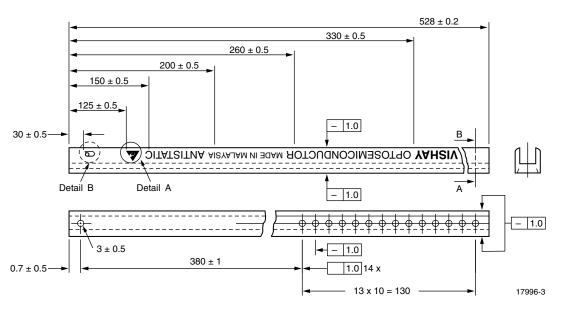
Shipping Tube Specifications for DIP-6 Packages
